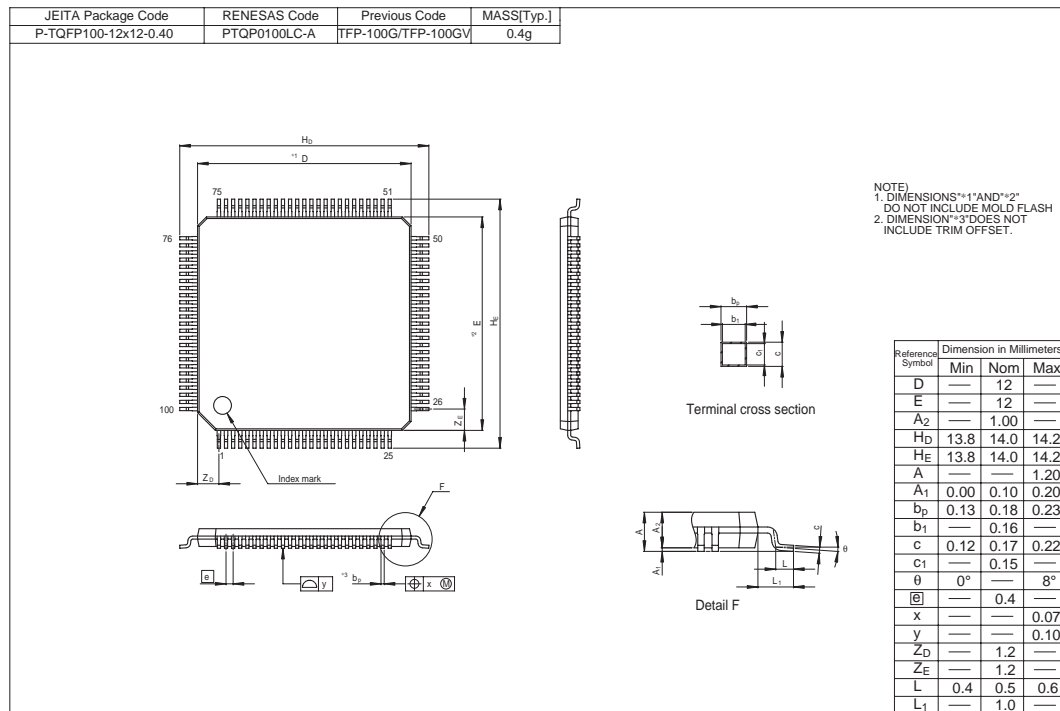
TFP-100G and TFP-100GV Package Dimensions
